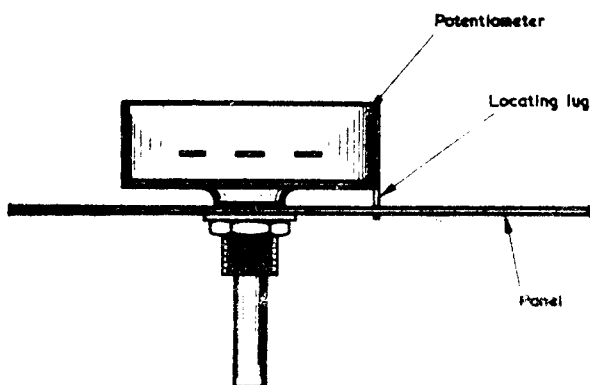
When fitting a potentiometer or rotary switch the locating lug should pass through a hole in the panel
